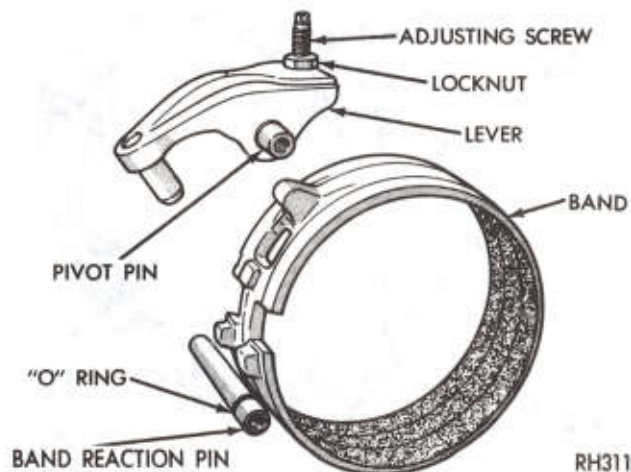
Double-Wrap Band and Linkage (A-904T and A-999)
